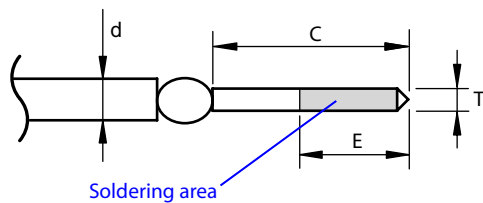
Outline drawing and dimensions for pin terminal used on all DIY signal wires.
